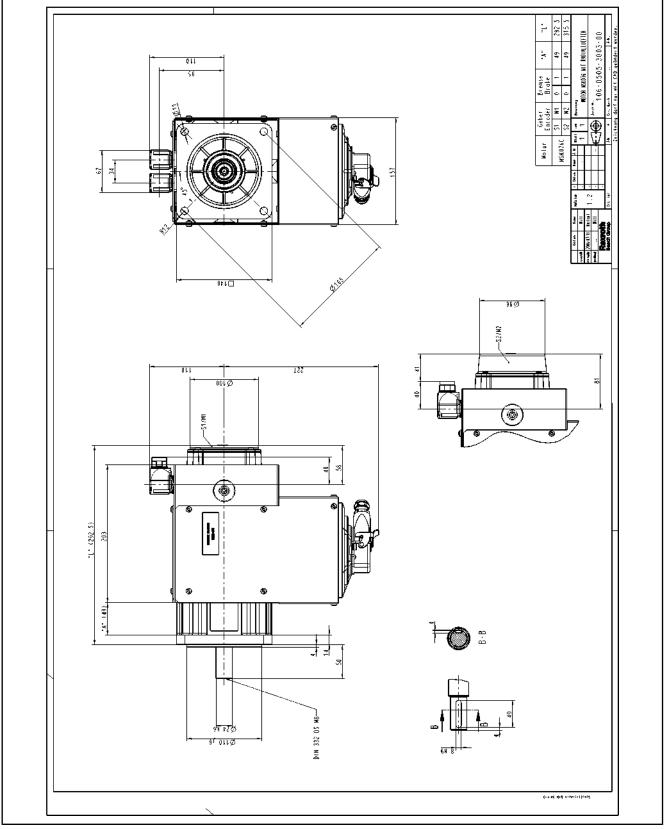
Dimension sheet MSK076 with radial fan unit
